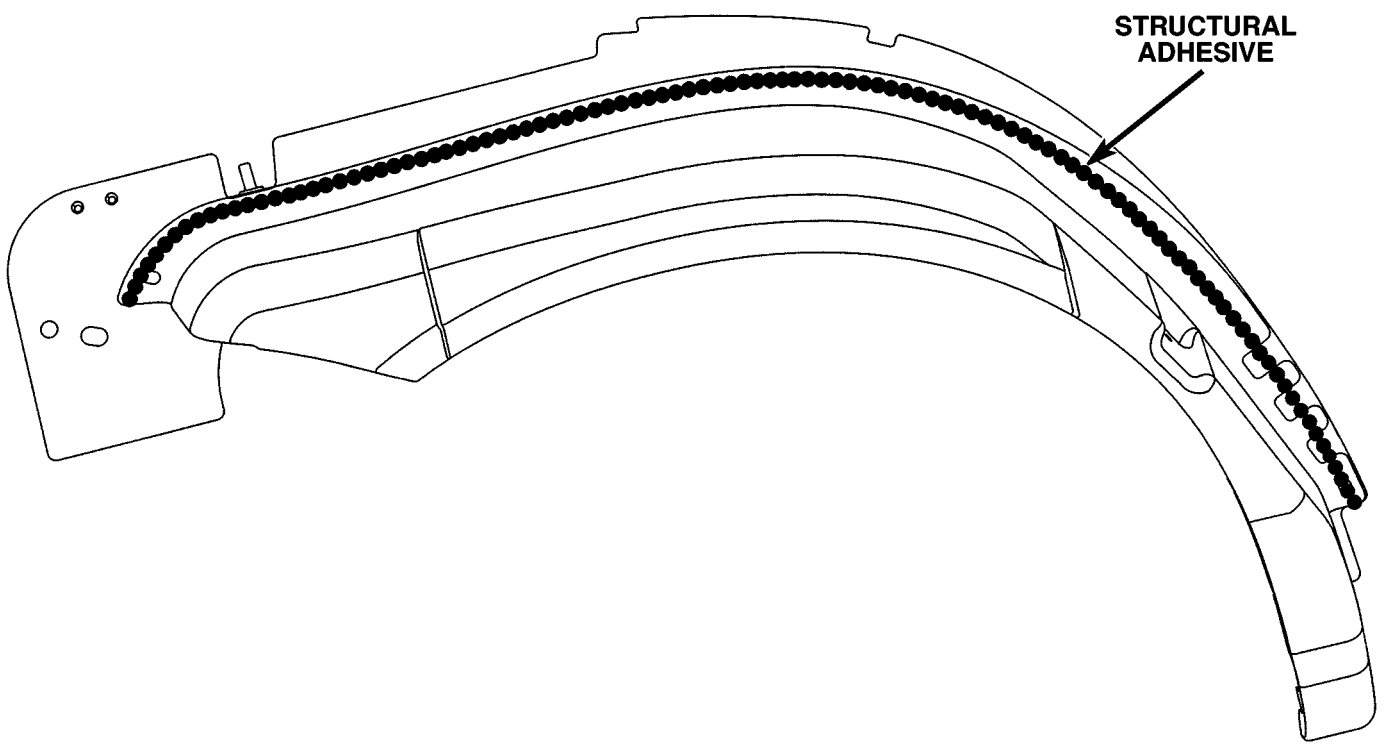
WHEELHOUSE RIGHT OUTER PANEL
